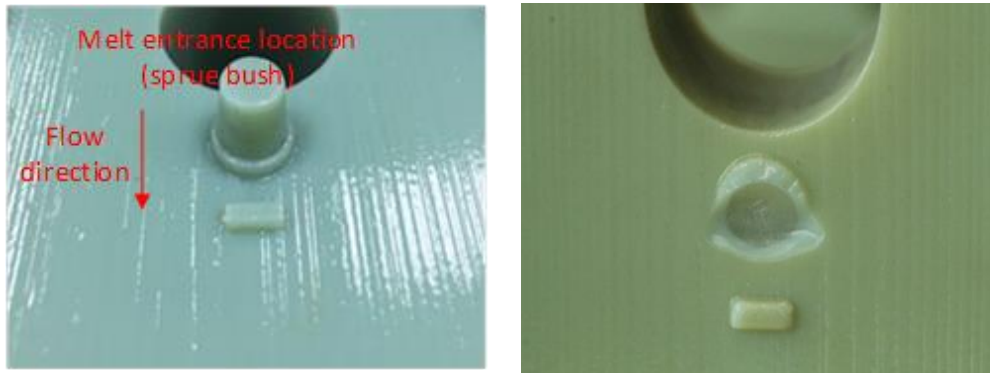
(a) Boss feature before moulding. (b) Bending failure of the boss feature due to high injection pressure. See Figure 4 for location on the tool.
